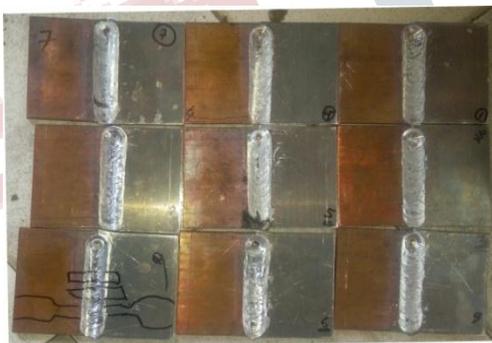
Al 6351-Pure copper (Joint) welded by FSW
